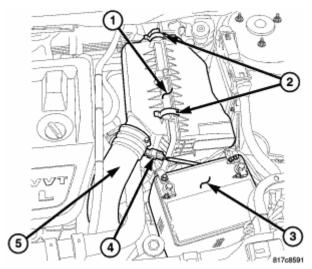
AIR CLEANER HOUSING Courtesy of CHRYSLER LLC
